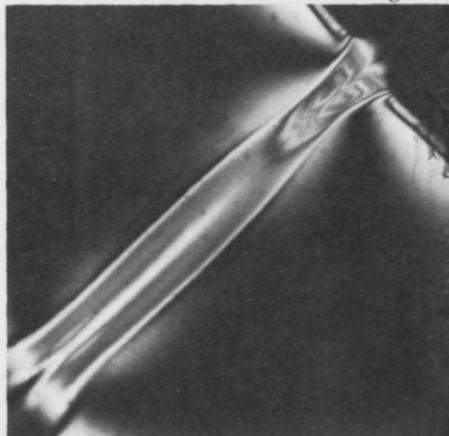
Photoelastic examination of the interface of two plastic parts that were welded by ultrasonic vibration. The actual length of the weld zone is about 0.7 cm.
